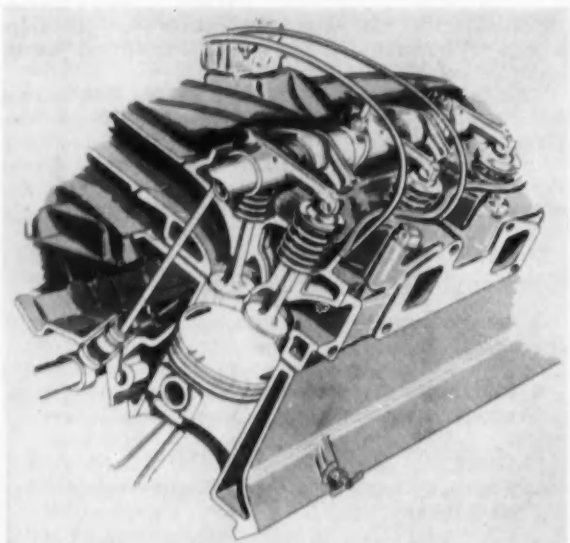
Cutaway of the valve train shows intake and exhaust valves are on opposite sides of the rocker shaft.
